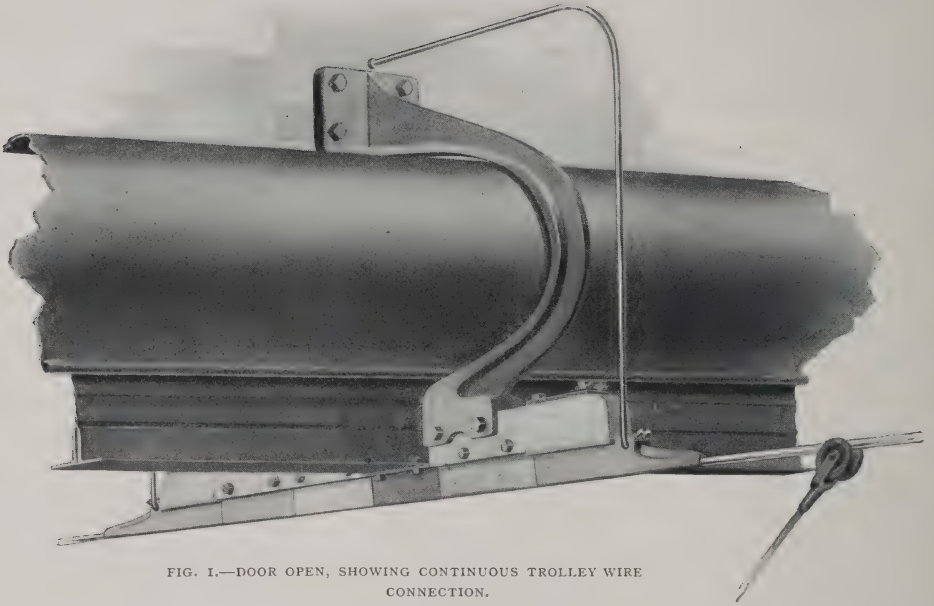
DOOR OPEN, SHOWING CONTINUOUS TROLLEY WIRE CONNECTION.
